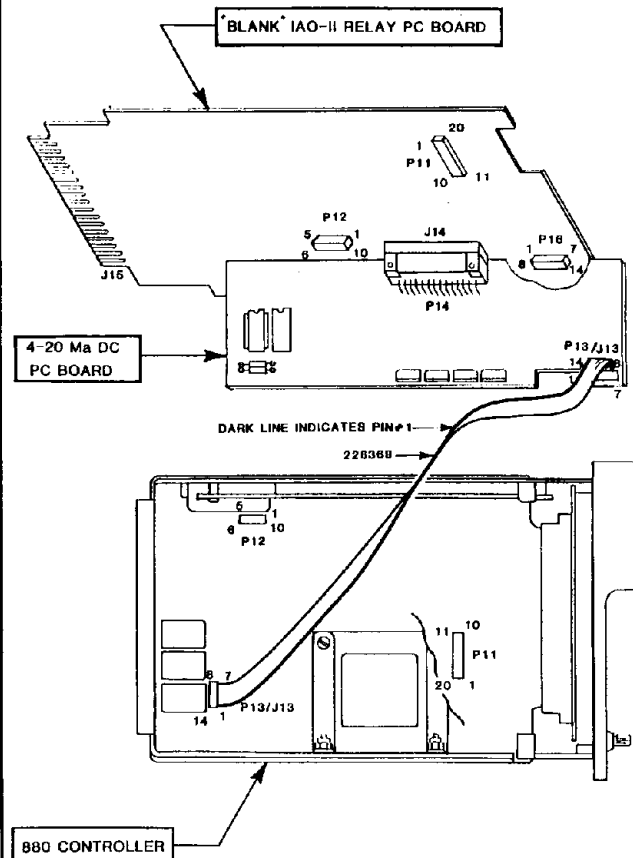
SYSTEM CABLE CONNECTIONS FOR THE 4-20 Ma DC & "BLANK" RELAY IAO-II PC BOARDS.
